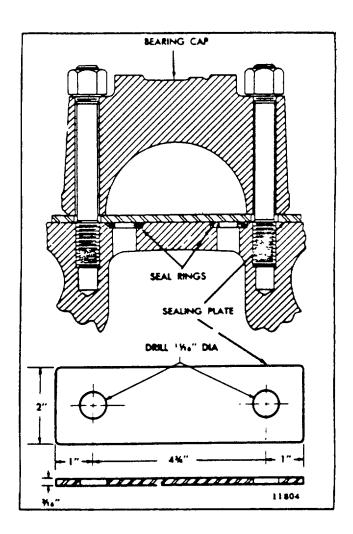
Sealing Plate Details for Pressure Testing Cylinder Block.
